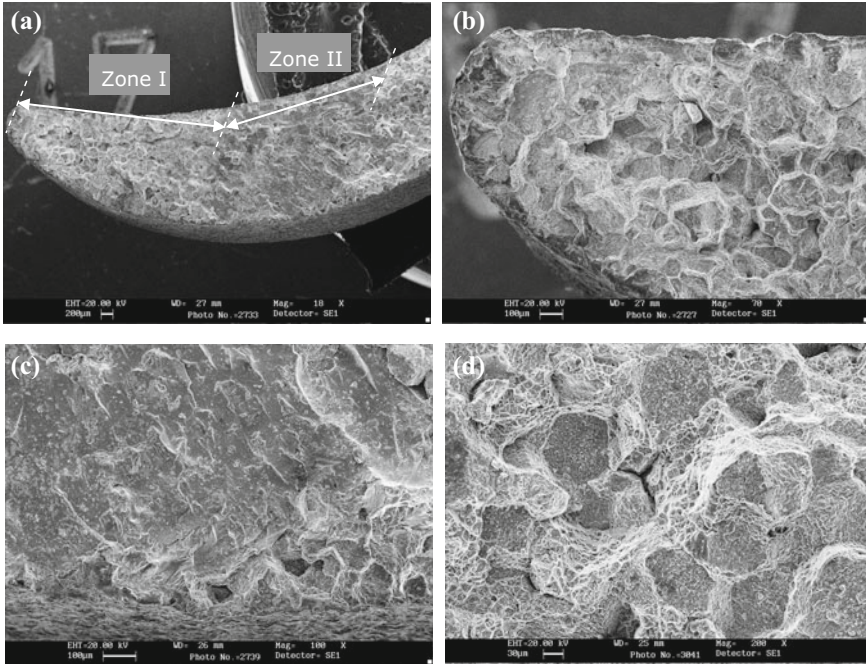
Scanning electron fractographs: a zone I and II, b magnified view showing transgranular cleavage fracture up to a depth of 250 μm , c crack arrest marks in zone II, and d intergranular fracture in zone III
